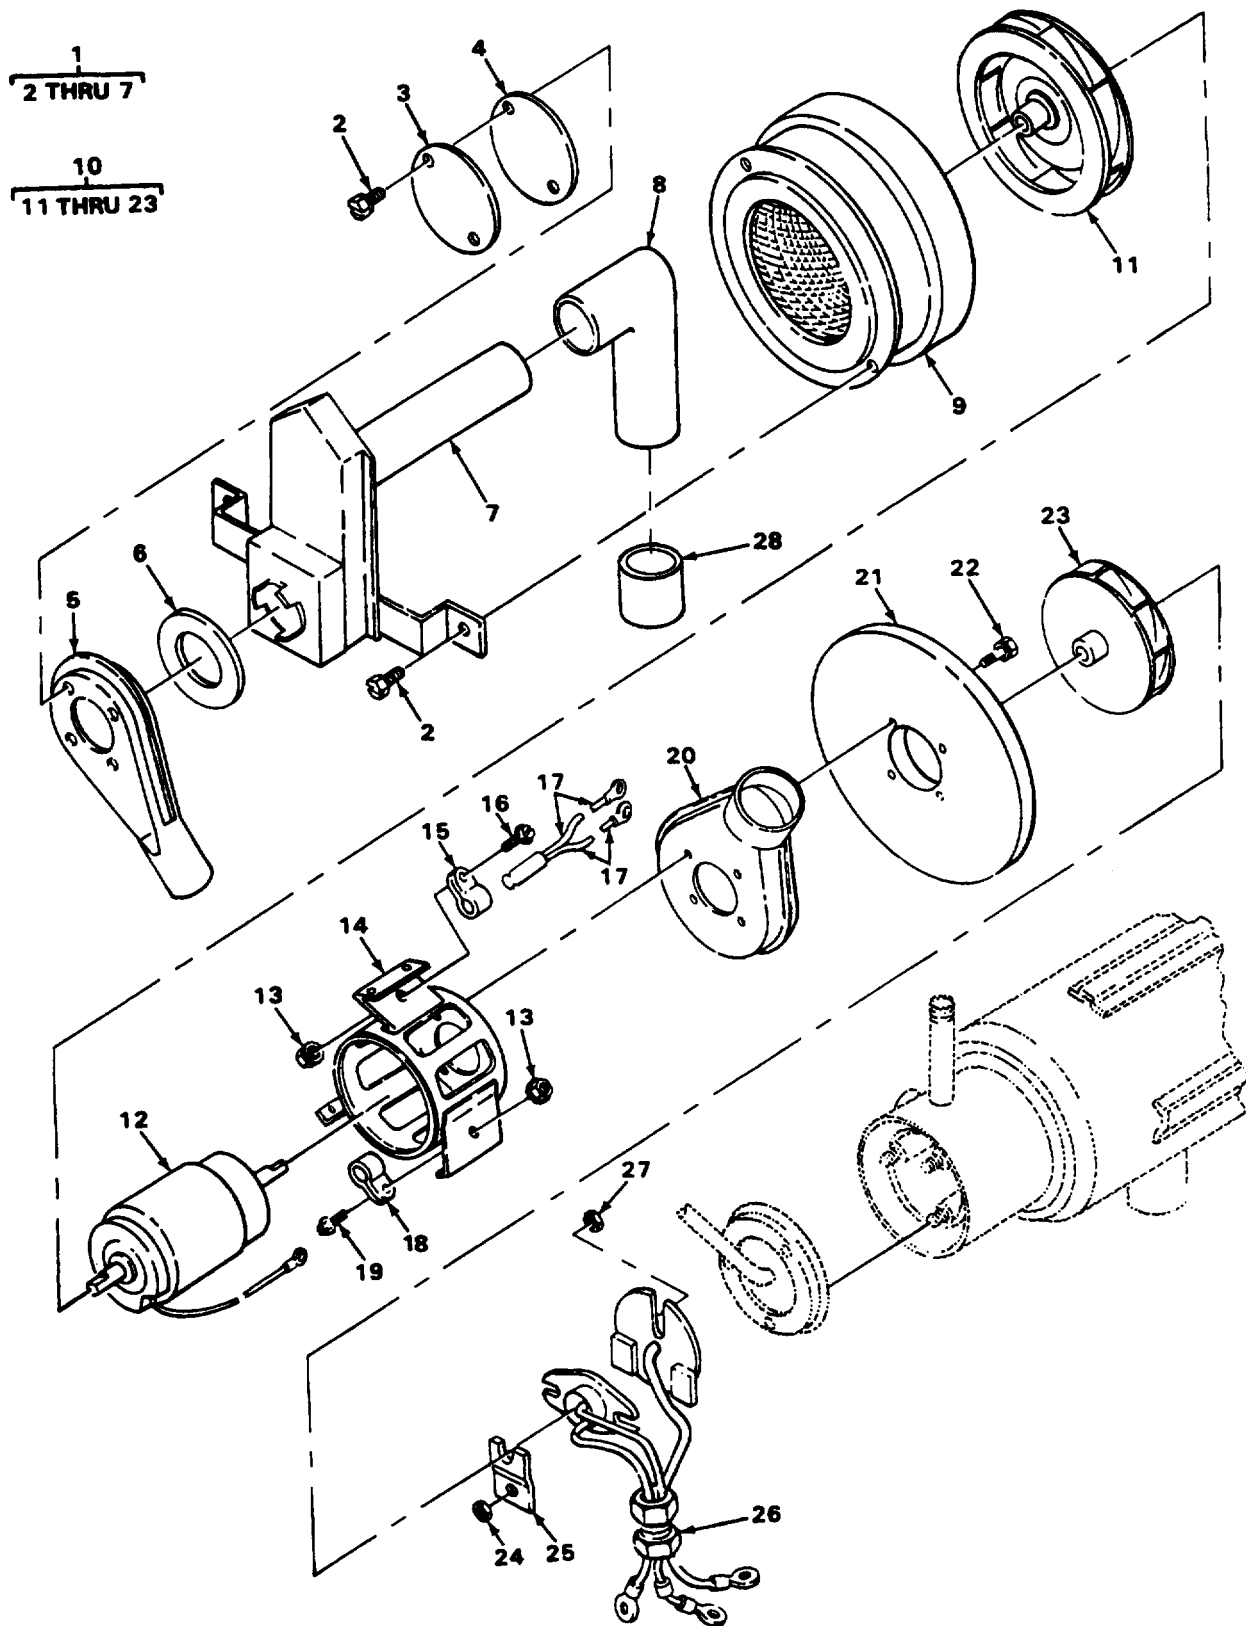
HUPP MODELS MF510B, MF510C, MF60B-24V PREHEAT ELEMENT, BURNER THERMOSTAT, BLOWER ASSEMBLY AND MOTOR.
